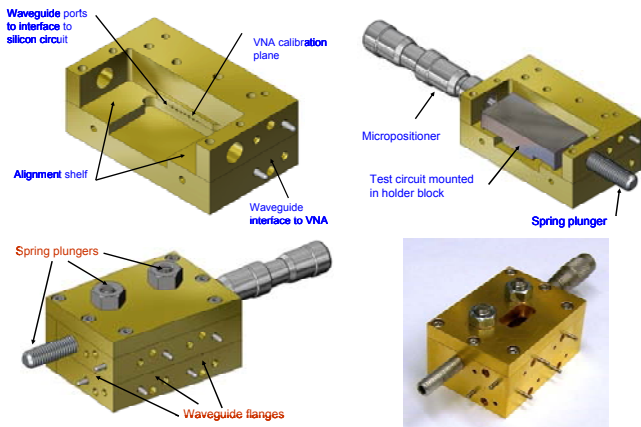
Schematic of the test fixture used to measure the silicon micromachined components. A photograph of the machined test fixture is shown on the bottom right.
